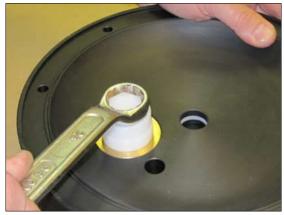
Tighten carefully by means of the mounting tool (pos 282) and a spanner.
